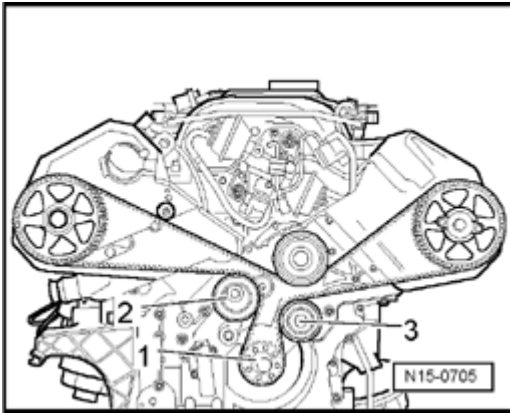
Crankshaft Gear, Toothed Belt Tensioner And Tensioning Roller
